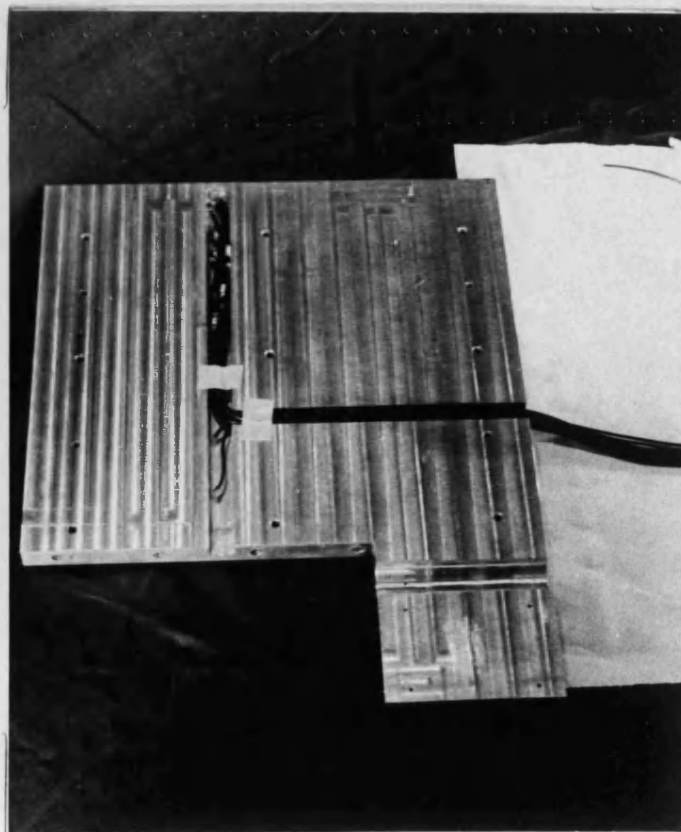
Components of fin machined from solid aluminium billets (holes for pressure tappings not drilled).
